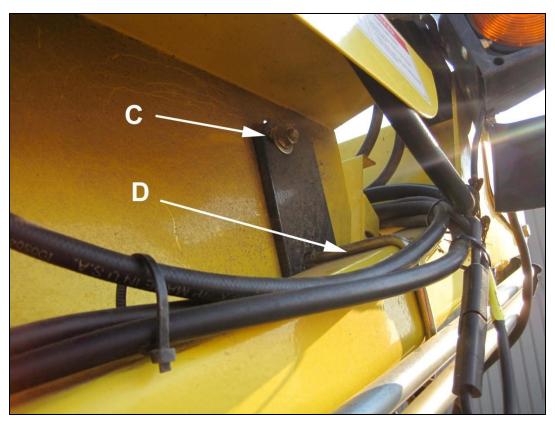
REMOVE BOLTS C AND D ON LEFT END
